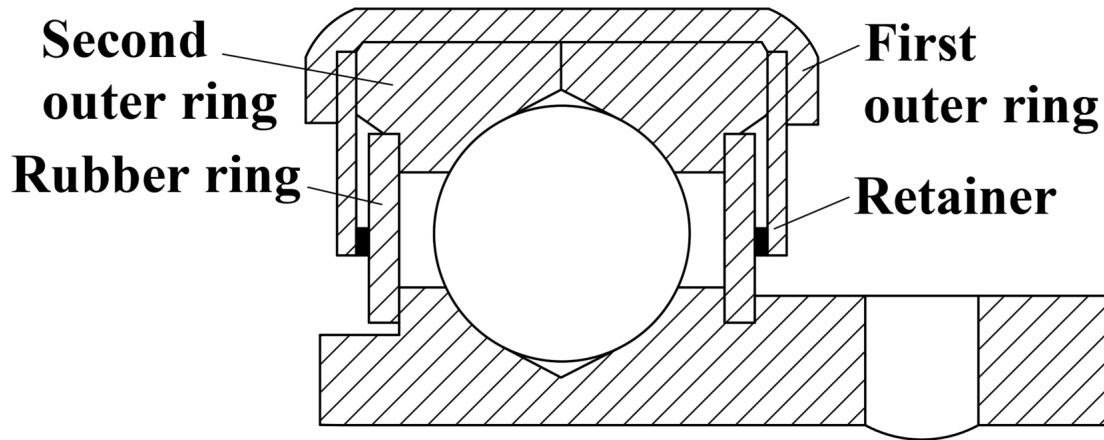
Double-outer-ring full ball bearing CN105736580A.
